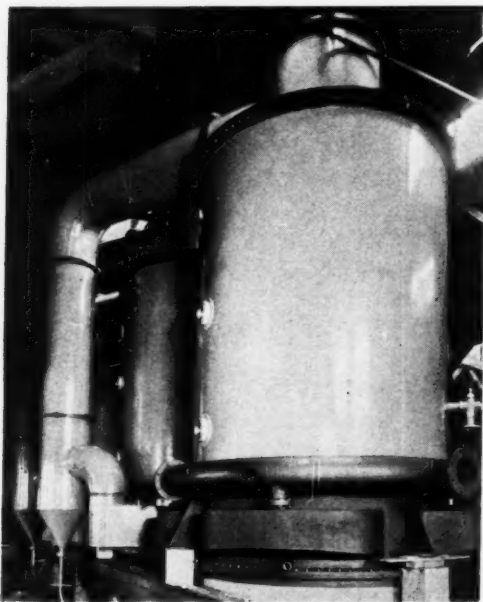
Alloy sheets pressed and welded aid in producing a pineapple cooker at low cost
